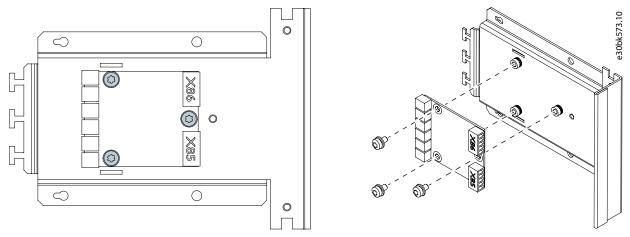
Removing the AuxBus Temperature Measurement Board on the Assembly Plate
